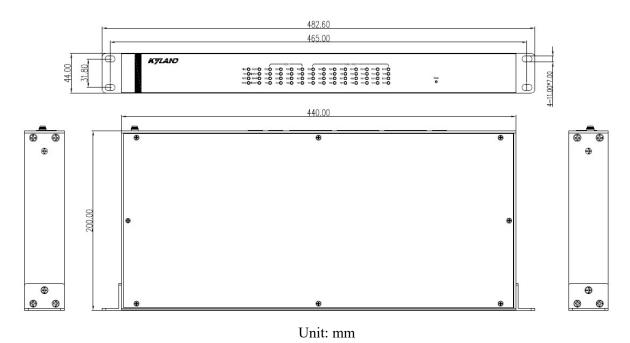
KPS3224A/KGW3224A Dimension Drawing
